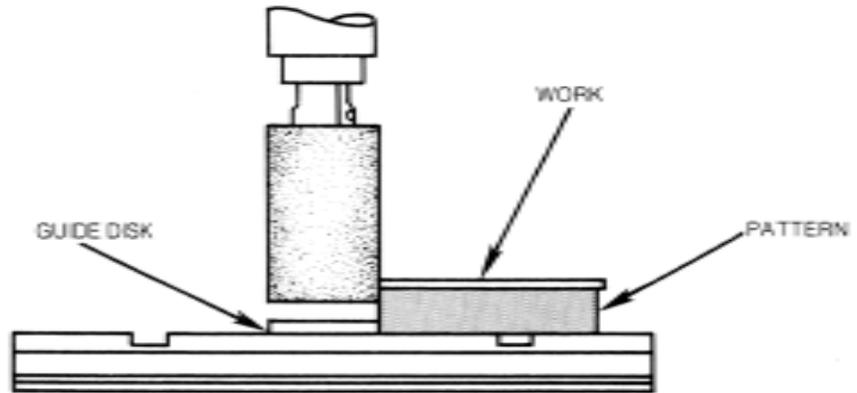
To make a special insert for pattern sanding, use a drum sander insert as a pattern. Locate the position of the guide disk with the drum sander mounted on the spindle. Attach the disk with glue and 1/2" brads.
